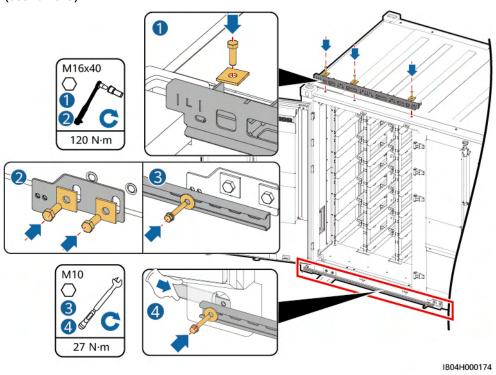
Installing the long top beam and the long bottom beam (scenario 3)
